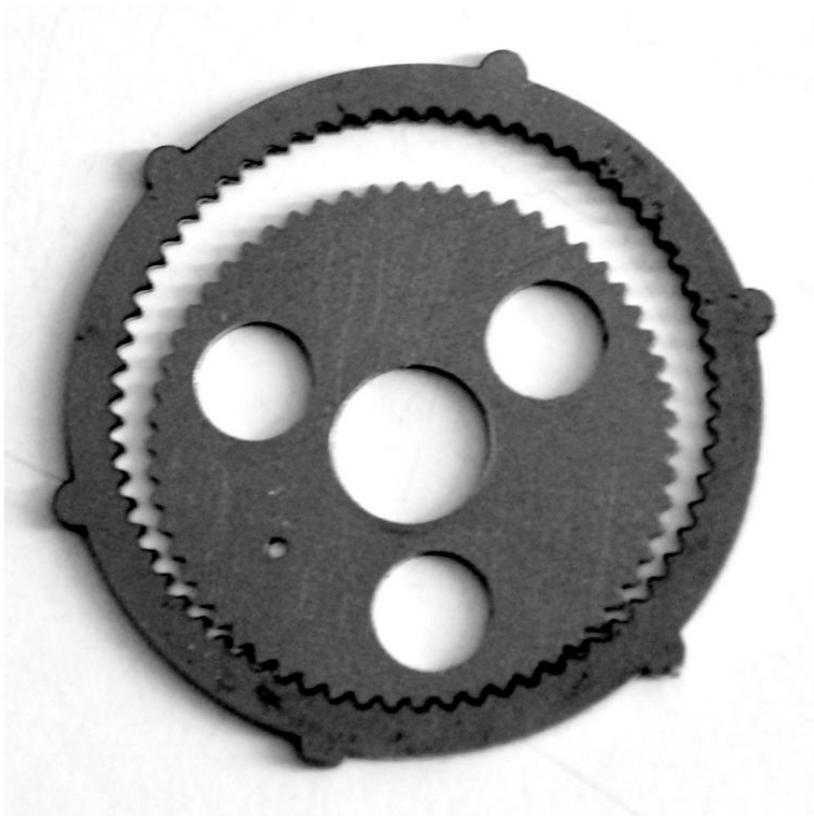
Assembly of wobble gear/output internal gear for the Domotics Actuator.
